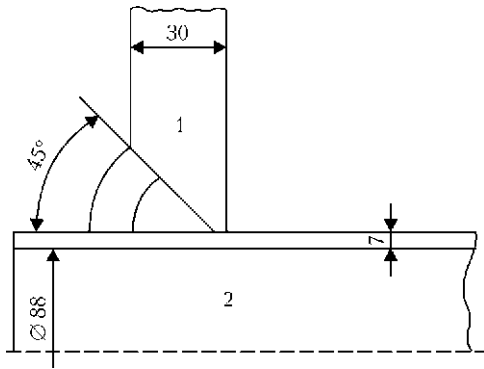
Plate 1 with pipe 2 welded with single-sided weld
